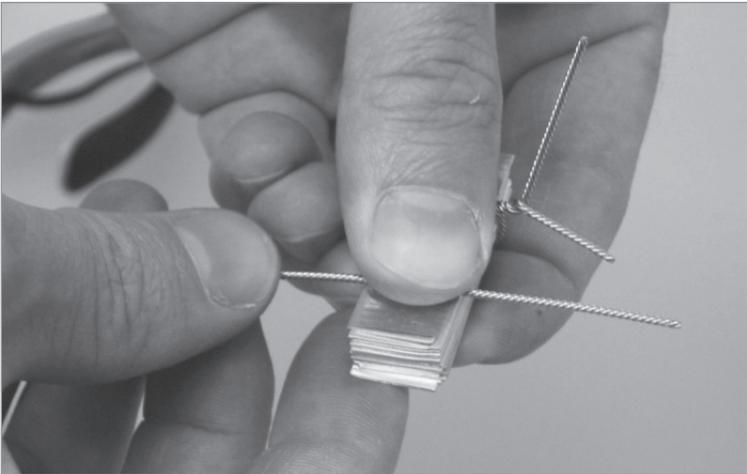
After cleaning, the metal was stacked into its alternating layer sequence. This stack had little contact between layers due to twisting and deformation caused by shearing the metal into size for firing of the billet (Figure 2).
